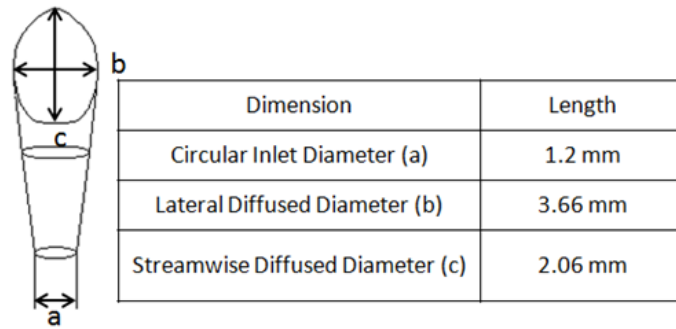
Drawing showing the geometry of the diffused shape hole of blade
